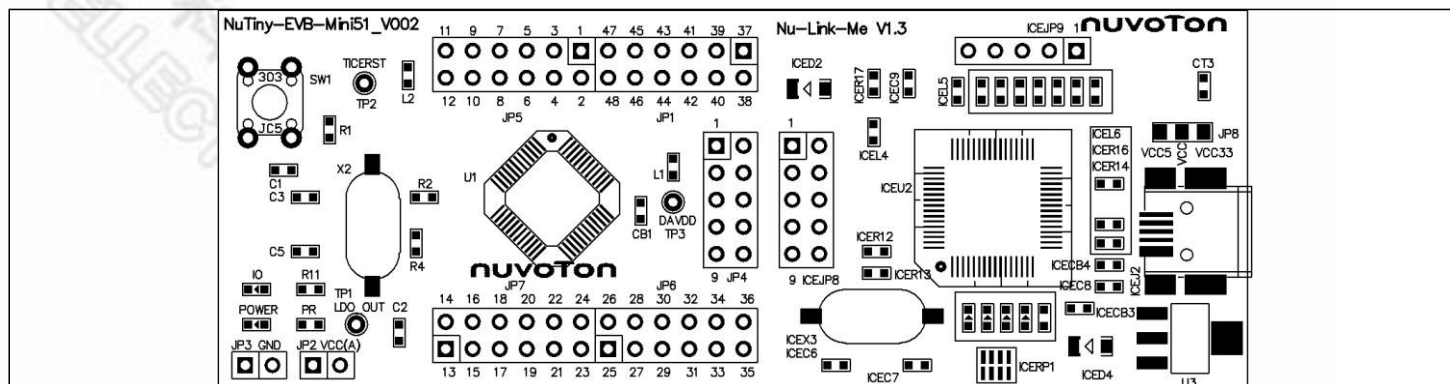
NuTiny-SDK-Mini51 PCB Placement
